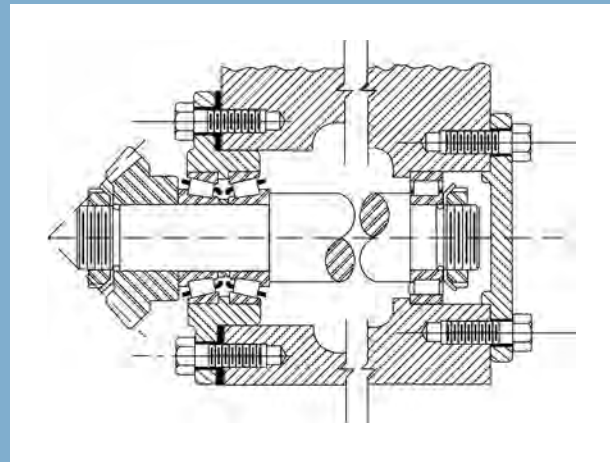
Arrangement recommended for long shafts to prevent temperature changes affecting position of gear mounted in oil-tight case.
